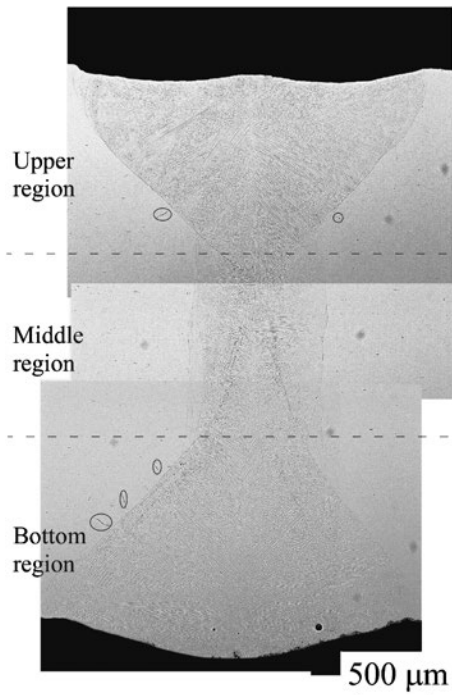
Microstructures of cross section of Hastelloy C-276 laser weld at laser power 8 kW and welding speed 2 m/min.
